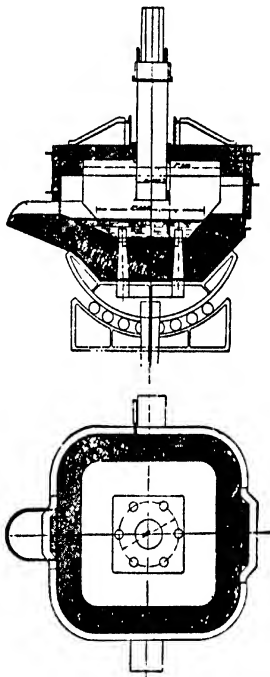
SECTIONS OF THE GIROD STEEL-REFINING FURNACE
